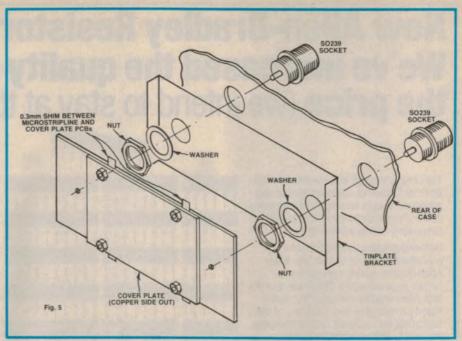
rear panel assembly details. The copper side of the cover plate faces outwards.
